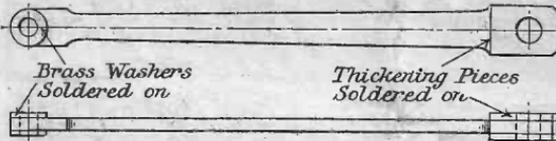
Connecting-rod for a model locomotive or horizontal engine.
